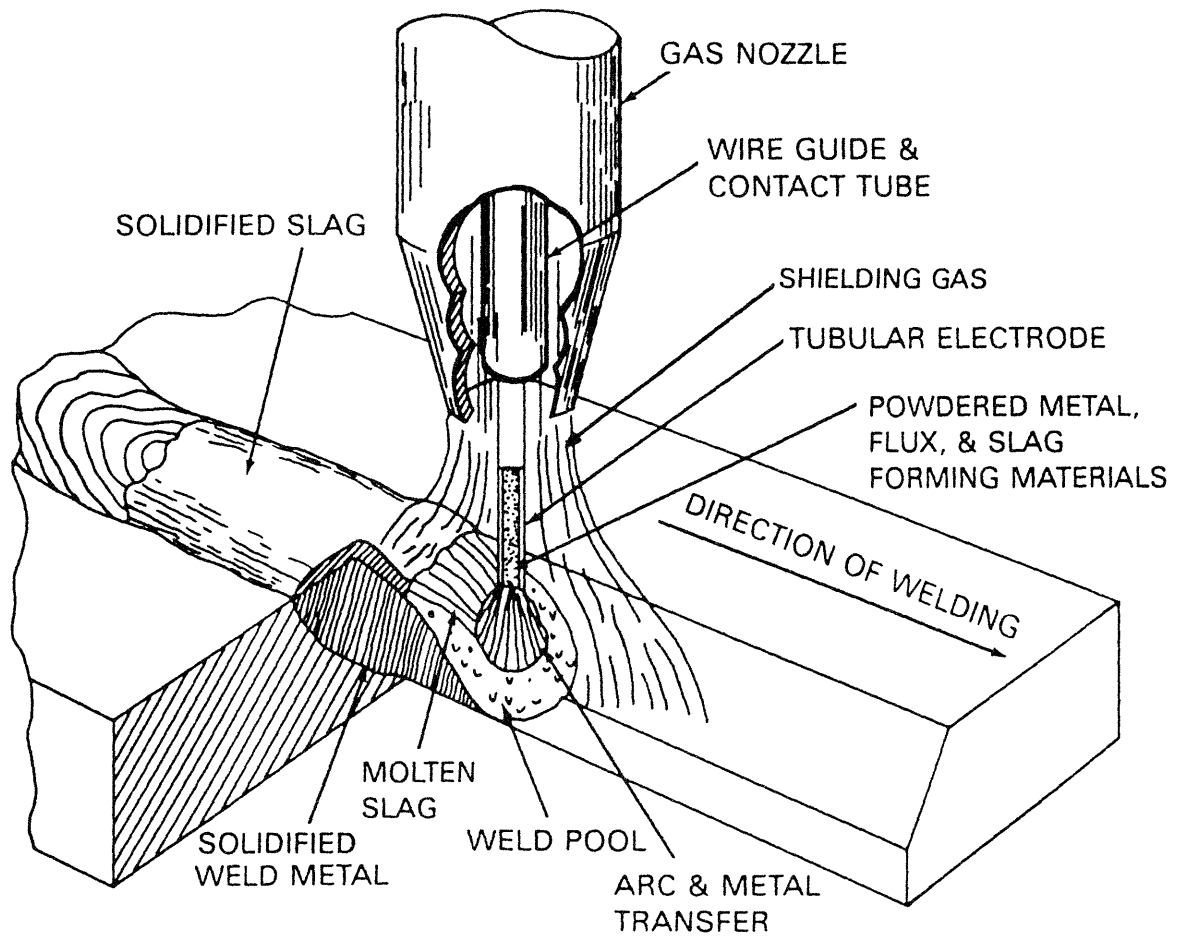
Gas Shielded Flux Cored Arc Welding
